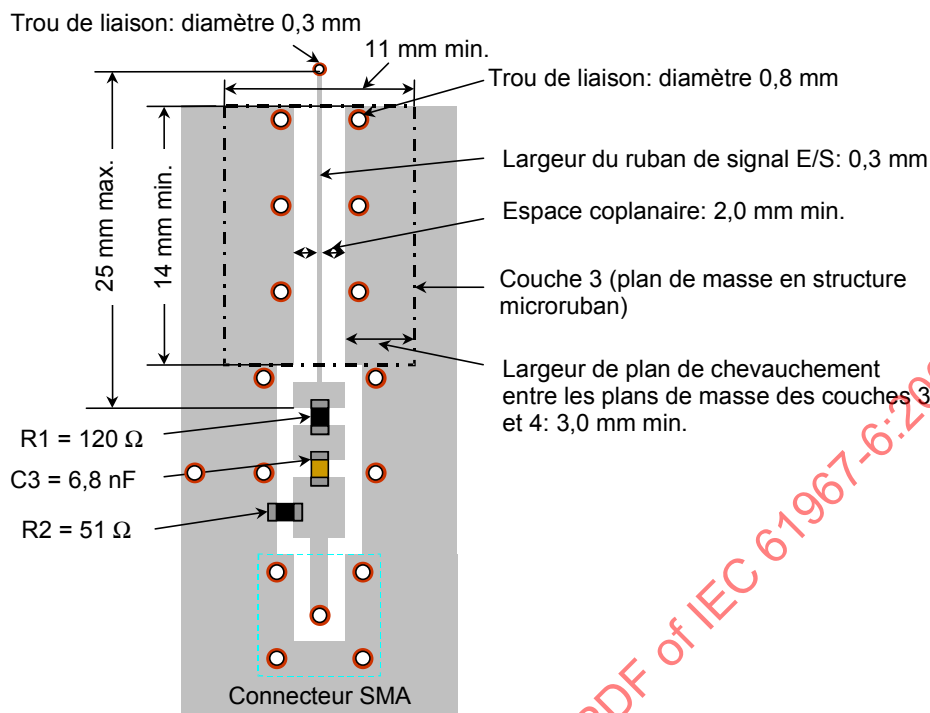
Standardized IC test board – Sectional view 2 – Measurement line
